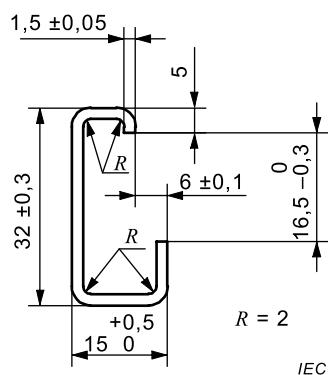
Tolerances (C 20, C 30, C 40 and C 50)
